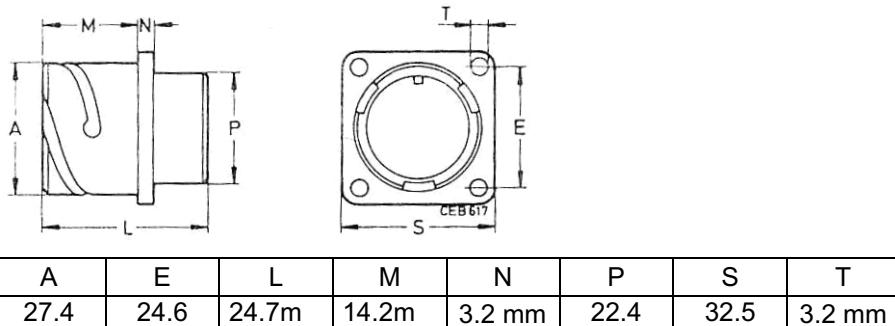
7-pin plug manufactured by ITT-Cannon "CA-02-COM-E16S-1S/P-B"
